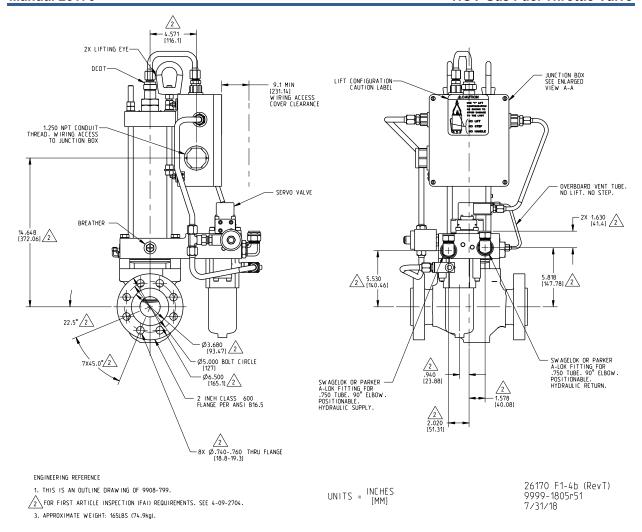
Outline Drawing, 2" Gas Fuel Throttle Valve (Low-pressure, Class 600 Version, Actuator Rotated 180-Degrees)
